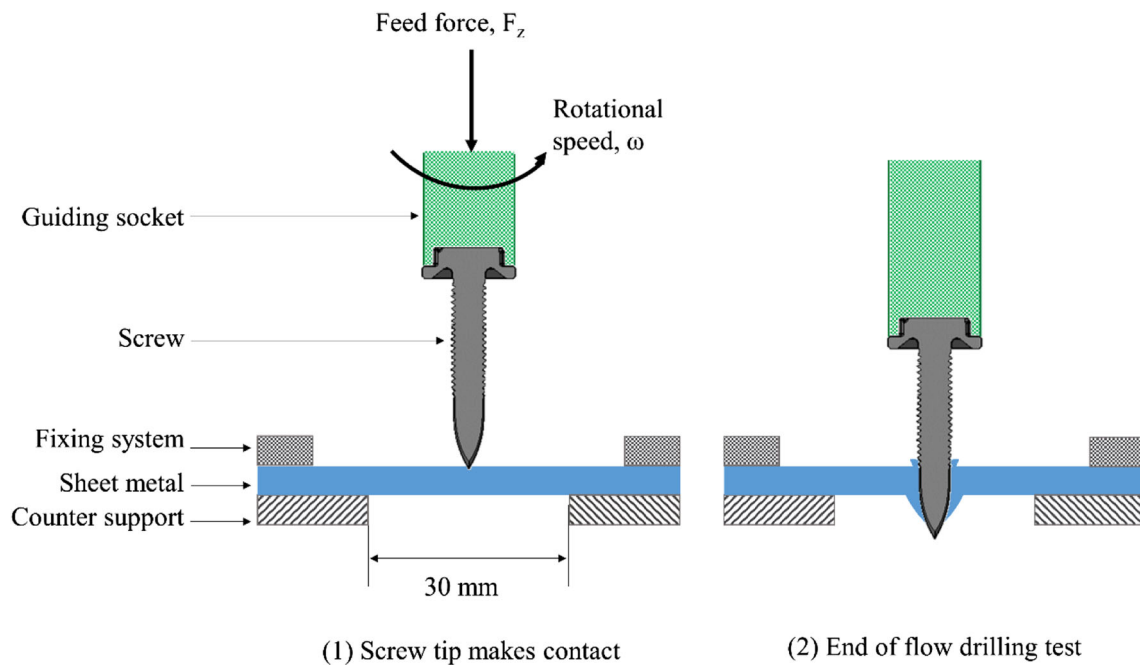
Illustration of flow drilling test on single-layer sheet metal clamped on a support
